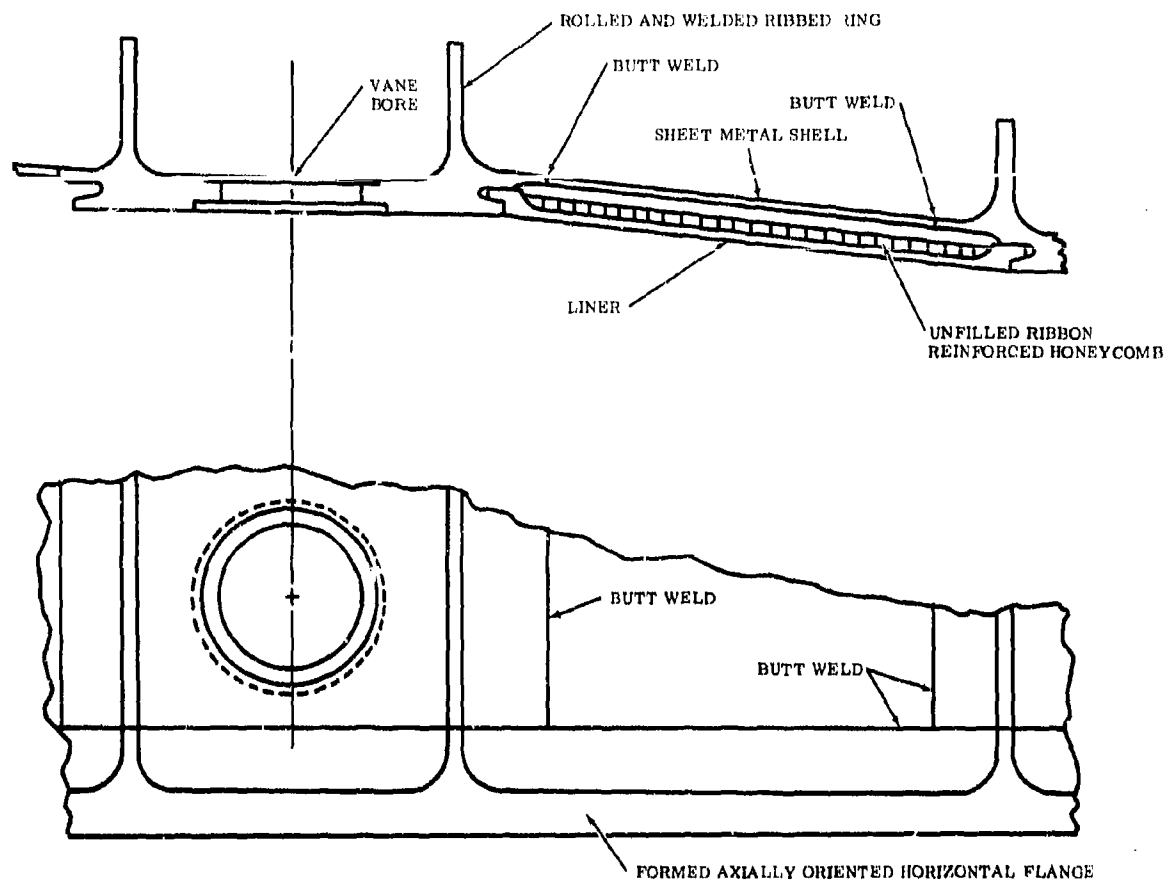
FABRICATED CASING DETAIL. Fabricated Casing Detail and Liner Configuration for Stages 4 thru 9
